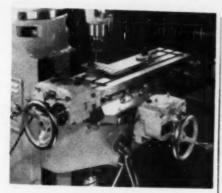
Benzon "Coordinators" Installed on a Machine Tool
